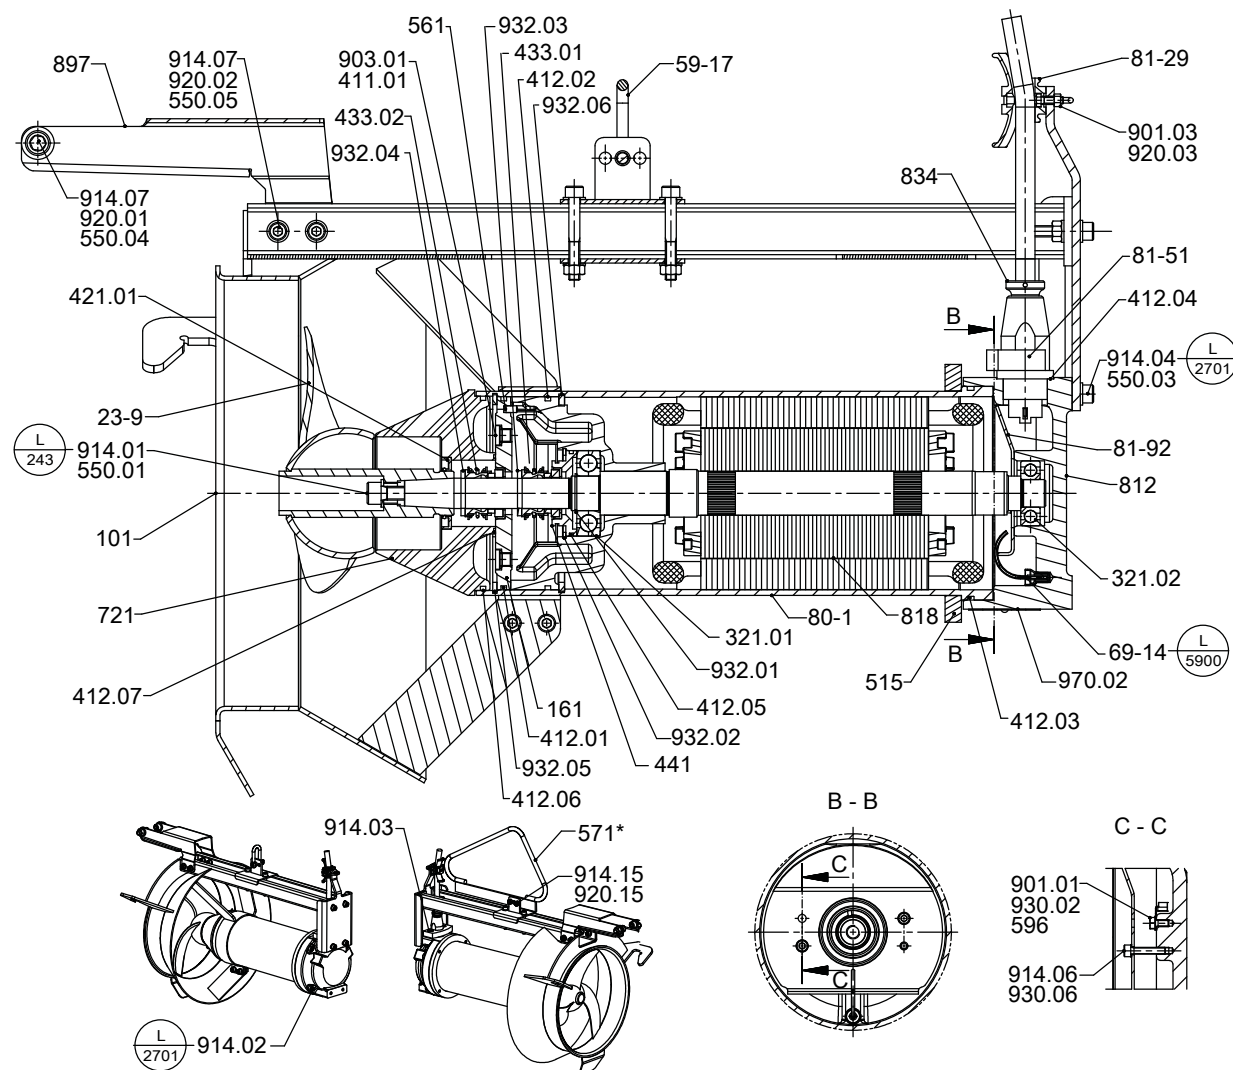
General assembly drawing: a) with shackle b) with bail (optional)
